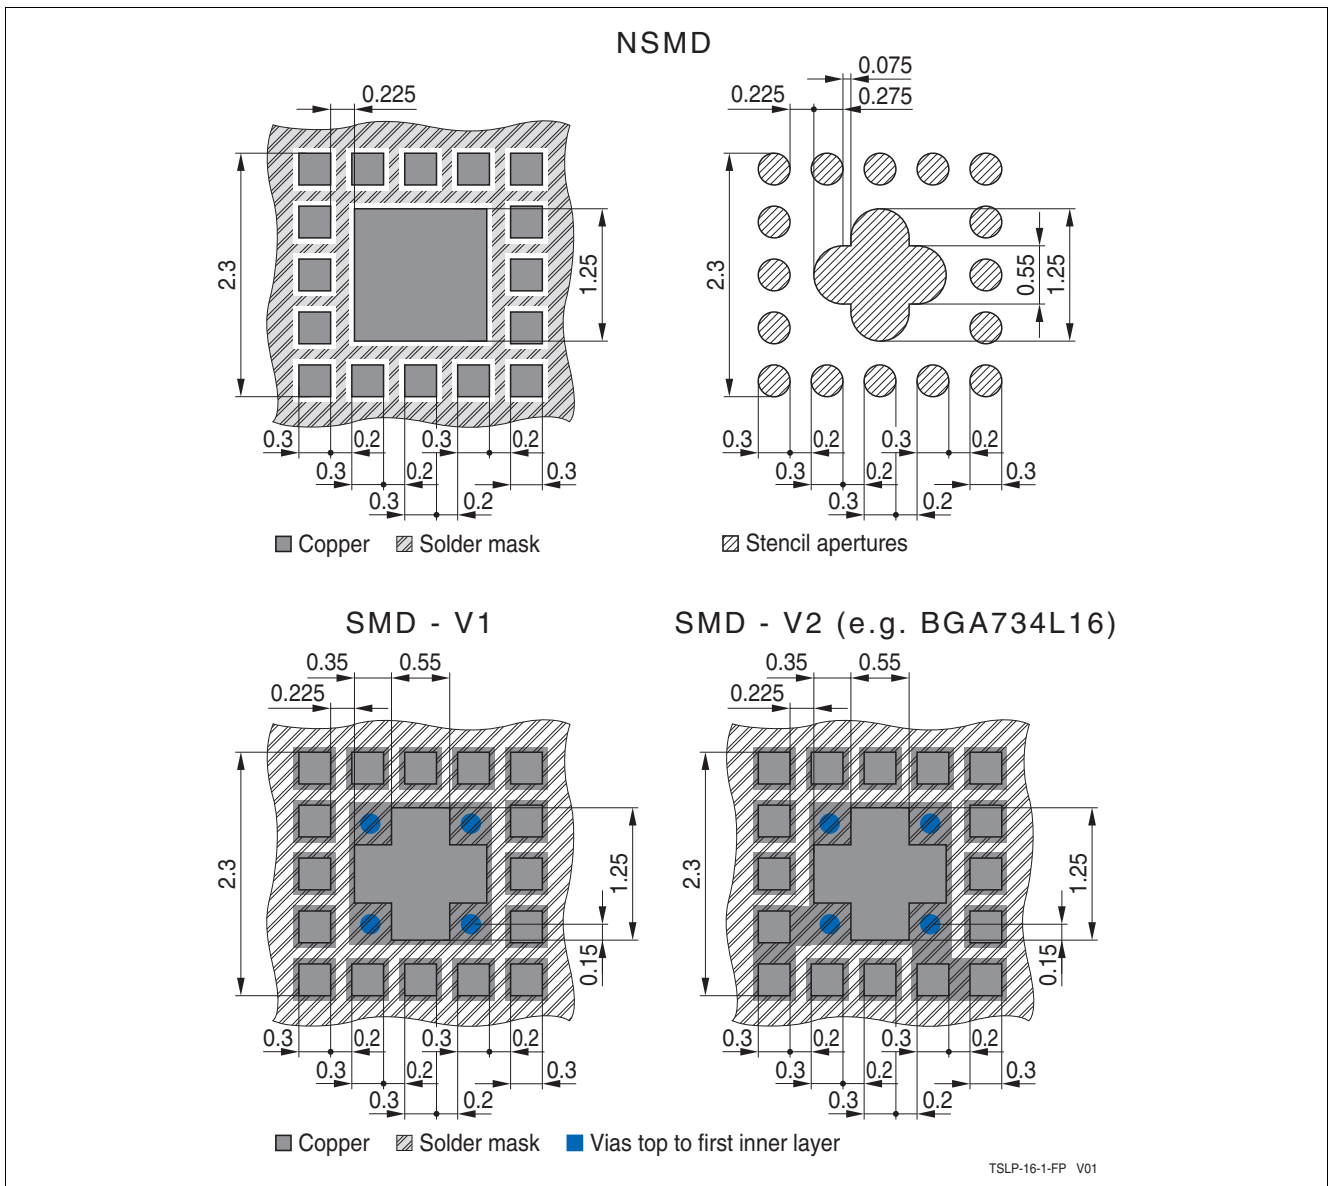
Recommended footprint and stencil layout for the TSLP-16-1 package. SMD - V2 footprint is used on IFX application board
